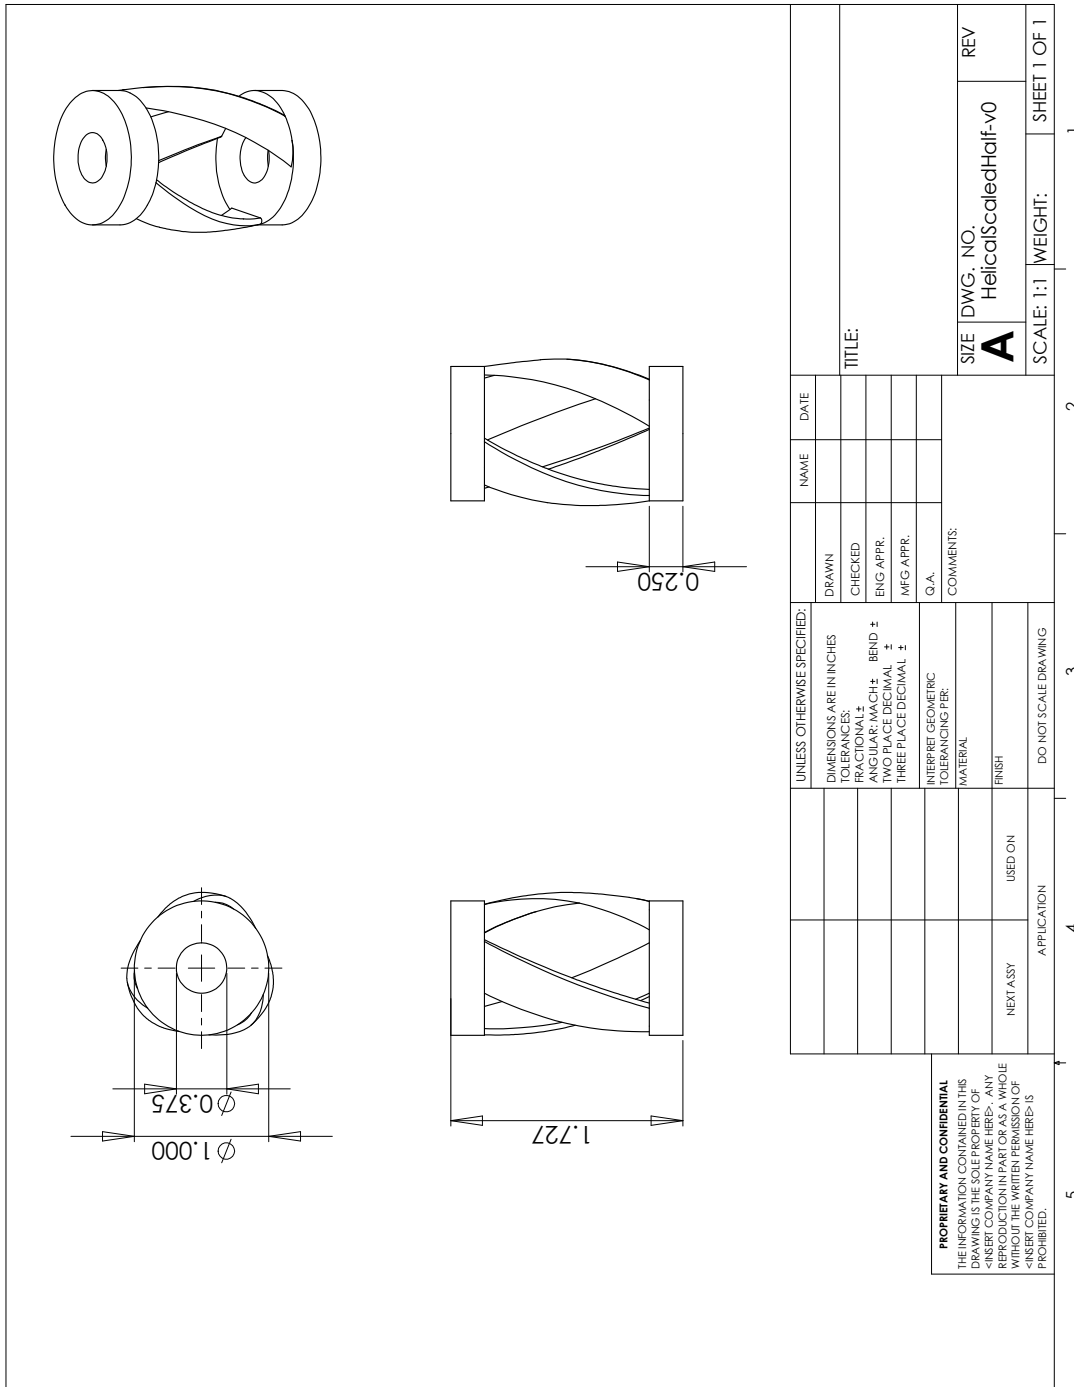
Gorlov Helical Darrieus Turbine Part Drawing.
